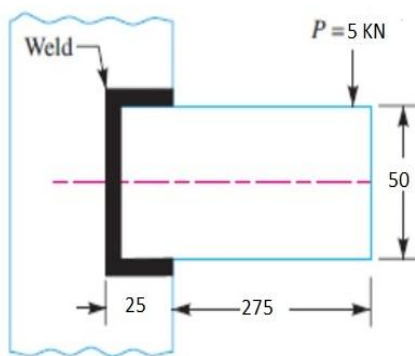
Symmetrical eccentric loaded welded joint
